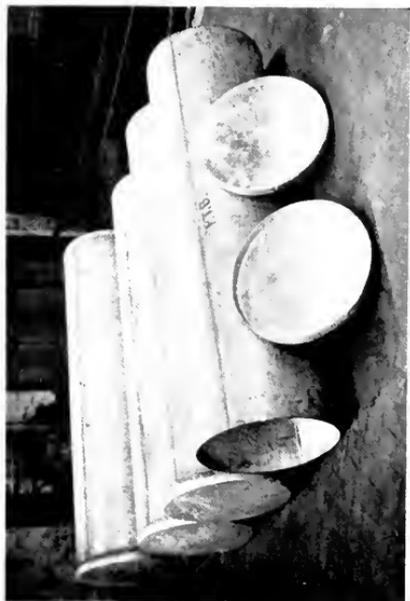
Tanks of Various Sorts, the Seams of which Are Electrically Welded
